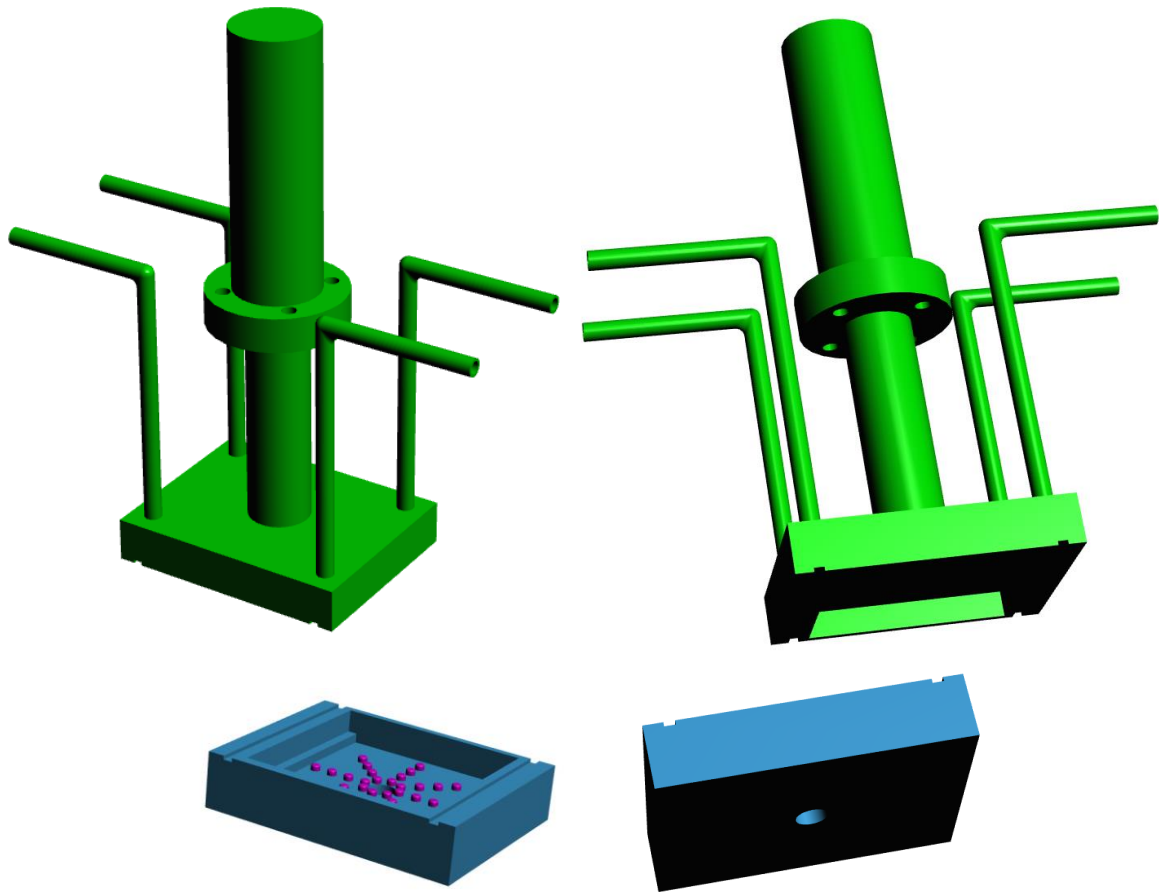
3 dimensional view presentations of the head and the base of the core slab holder equipment ensuring multiple brine parallel injection.
